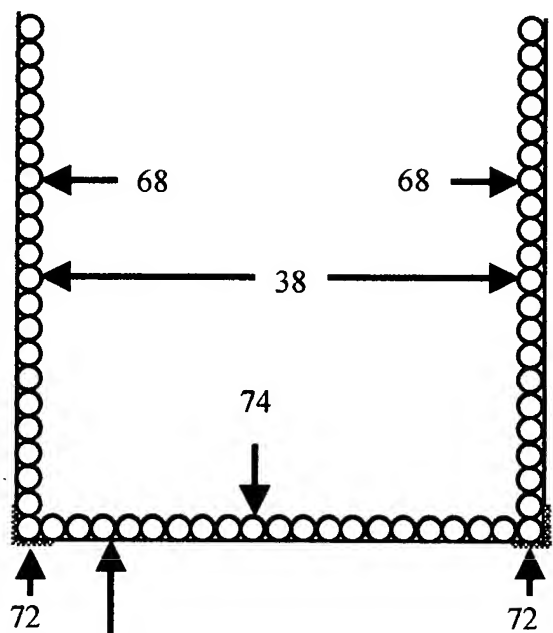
Erected Cross Sectional View Of End Panels And Bottom Panel
